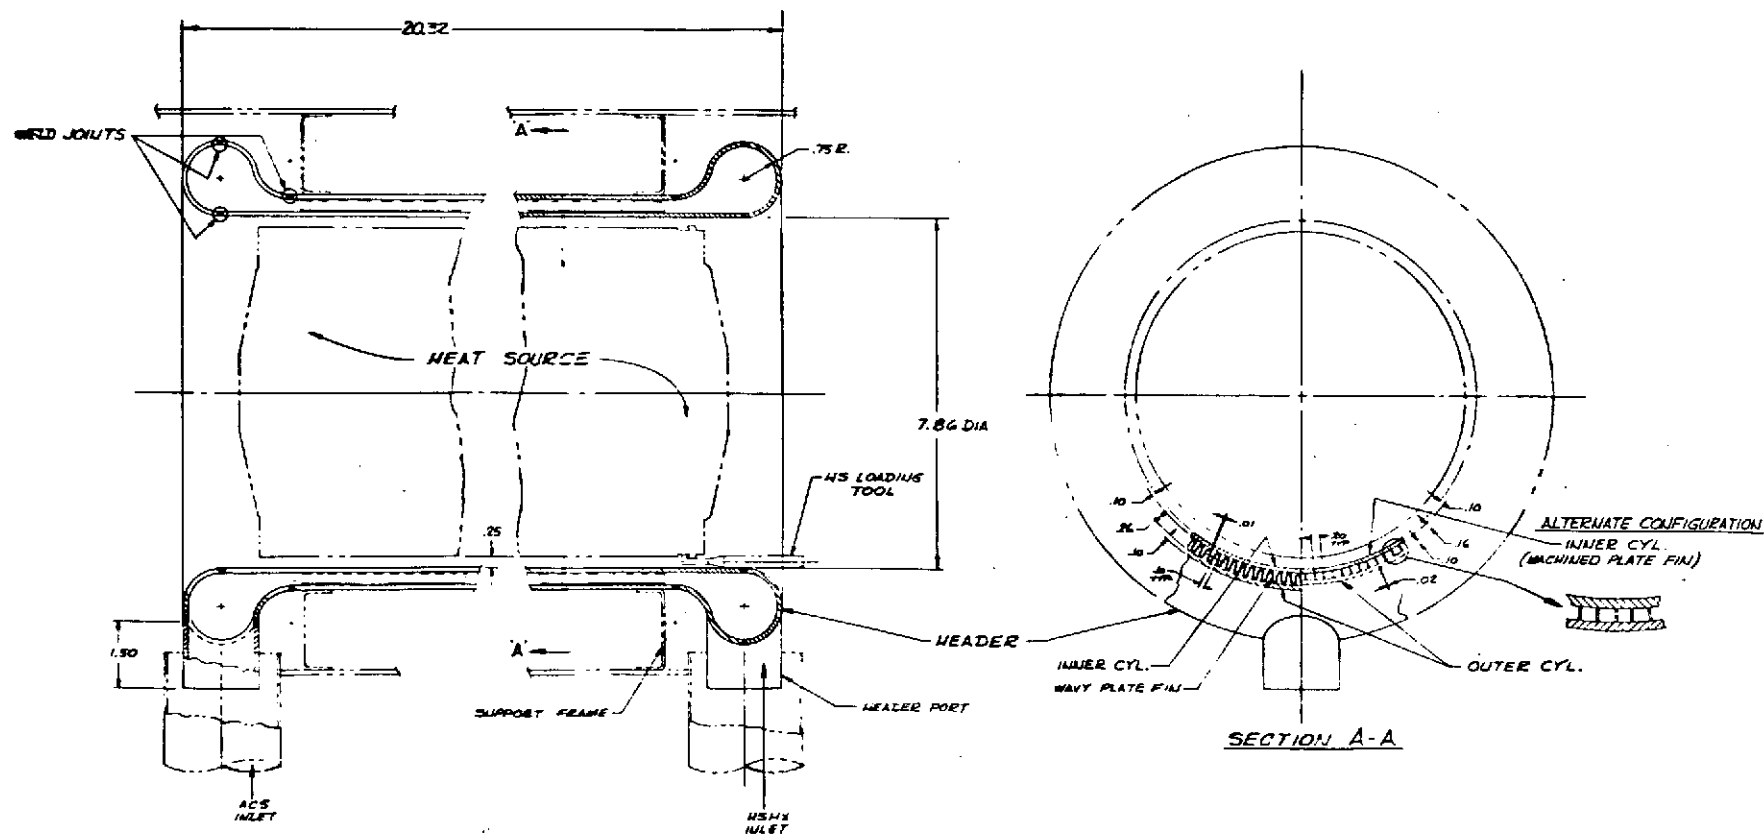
Machined and Corrugated Plate Fin Heat Exchangers
